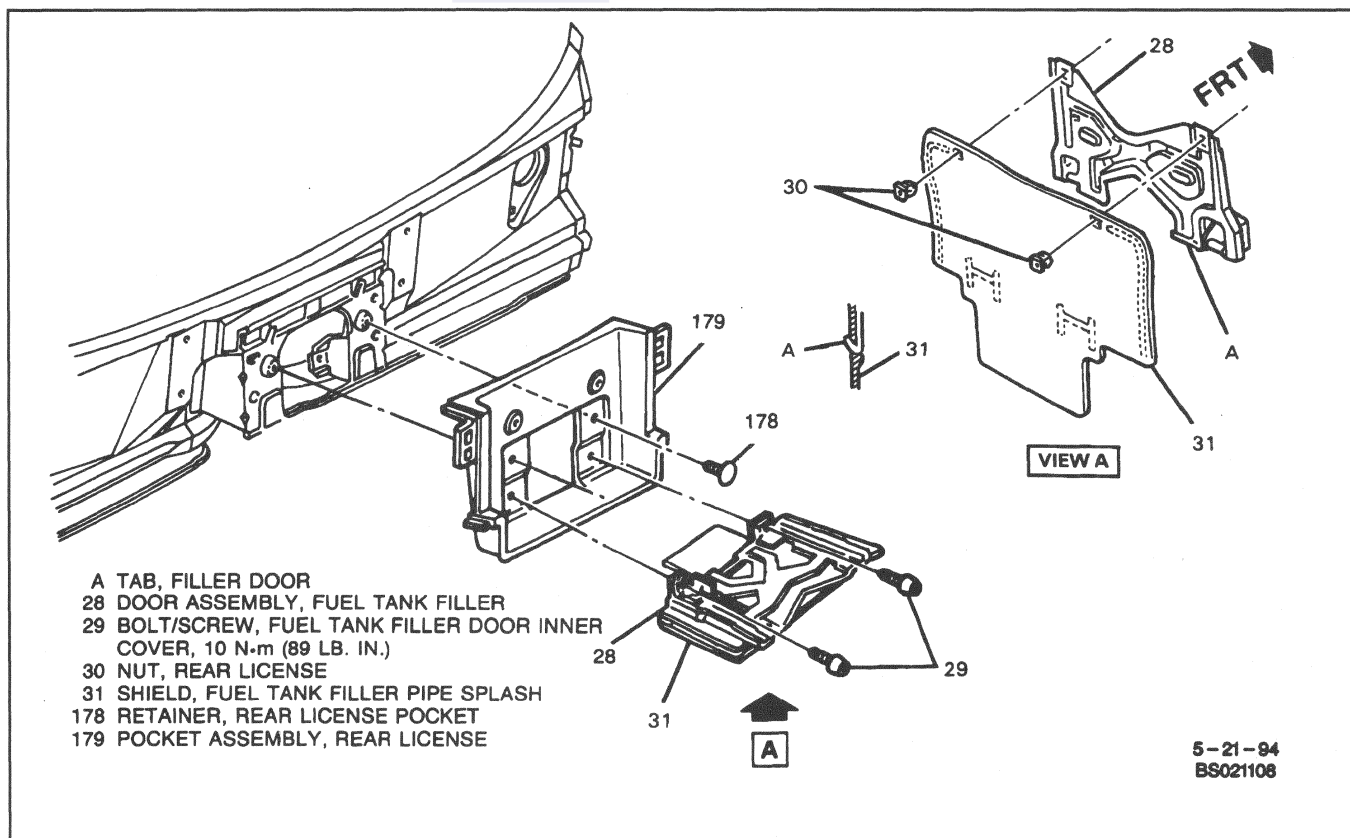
Rear License Pocket and Fuel Tank Filler Doors-(Buick)
